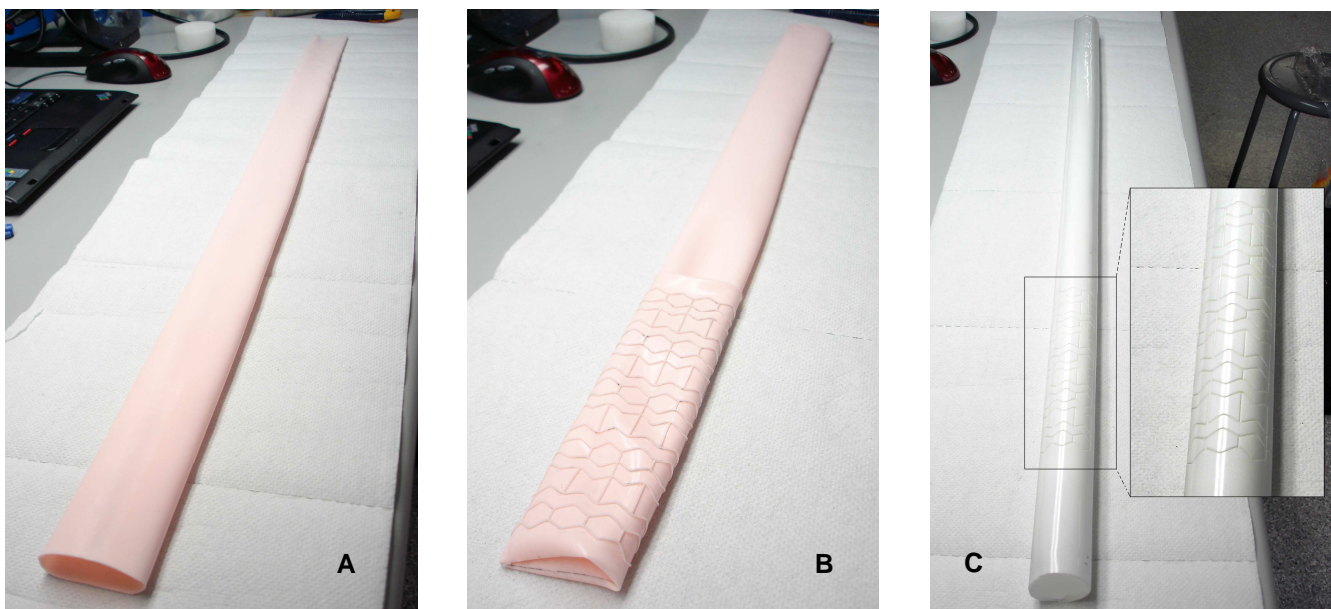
A) Silicone rubber mold with aluminium negative and plaster cast removed, B) rolled inside out partially to reveal protruding stent pattern. C) Thin-walled plastic cylinder made with polyurethane. The inset shows the stent pattern in detail.
